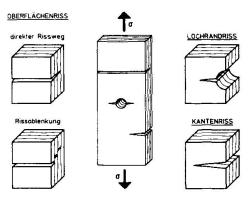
Orientation of cracks found in anisotropic steels as wrought iron or old mild steels left side: surface cracks right side: edge crack or with multiple deviation corner crack in hole
